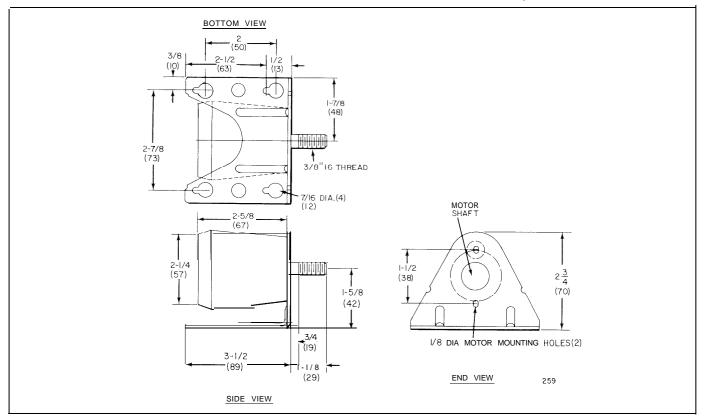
MP913A AND ANGLE BRACKET (PART NO. 14003640-001) APPROXIMATE DIMENSIONS IN INCHES (MILLIMETERS), SHOWING STANDARD SHAFT.
